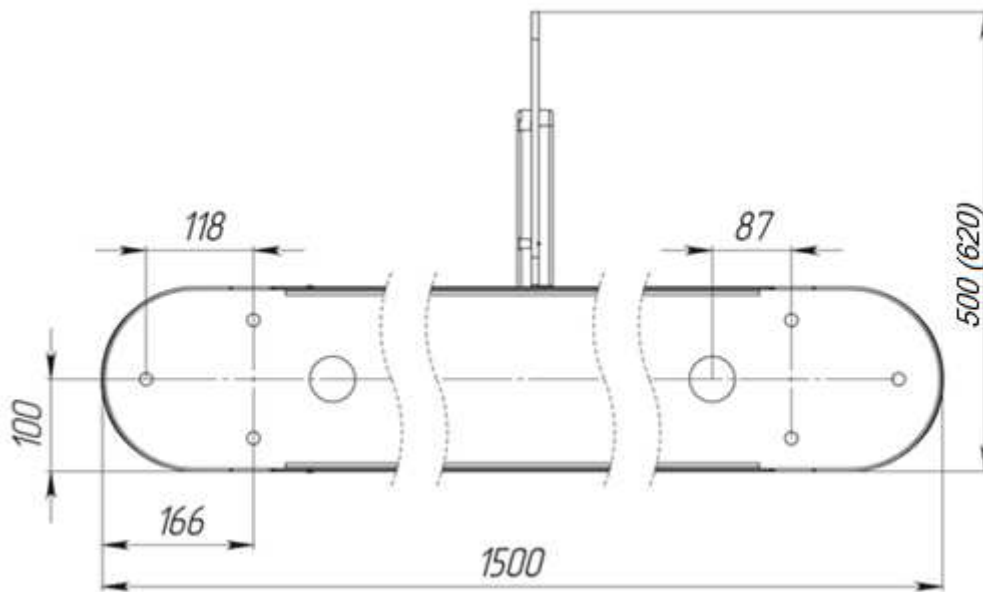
Location of mounting holes in relation to the overall dimensions of the speedgate
